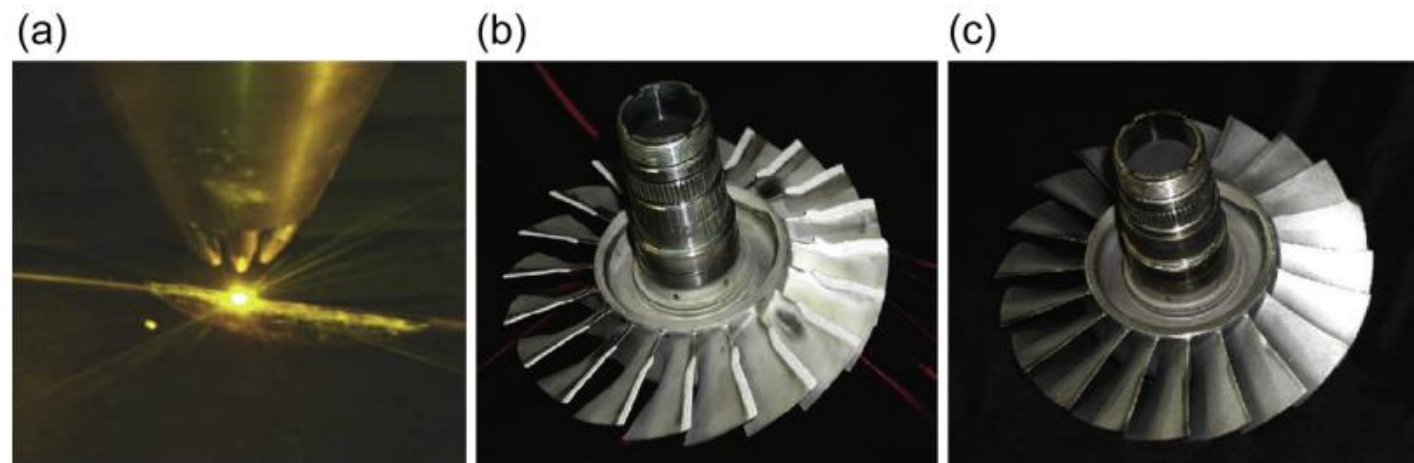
T700 blisk repair using the laser engineering net-shape process: (a) in-process repair of the leading edge of a Ti64 airfoil, (b) the blisk after deposition, and (c) the blisk after finishing.
